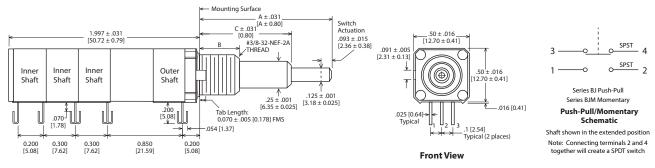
SHA13: Concentric Shafts, Solder Hook, 3 Potentiometer(s) or RS + MP, 3/8" Bushing
